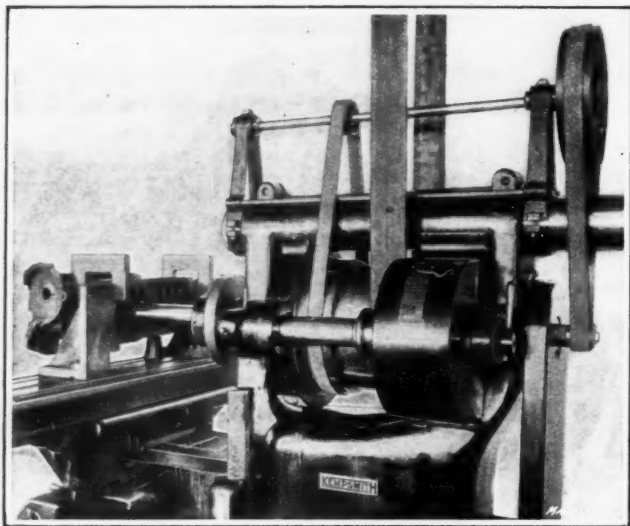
Woods Boring and Grinding Attachment set up on No. 3 Kempsmith Miller
